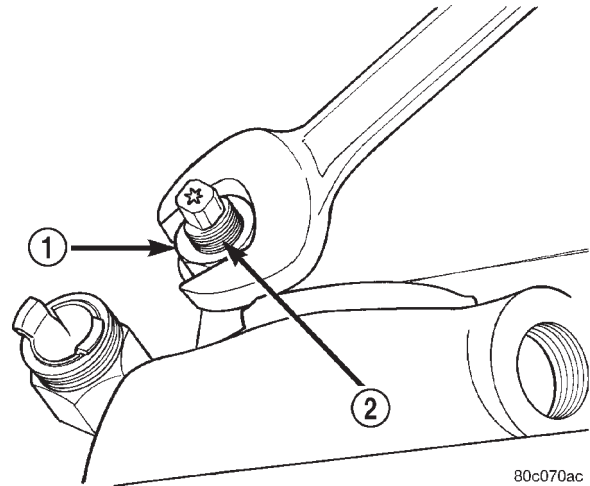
Tightening Front Band To Hold Front Clutch In Place
